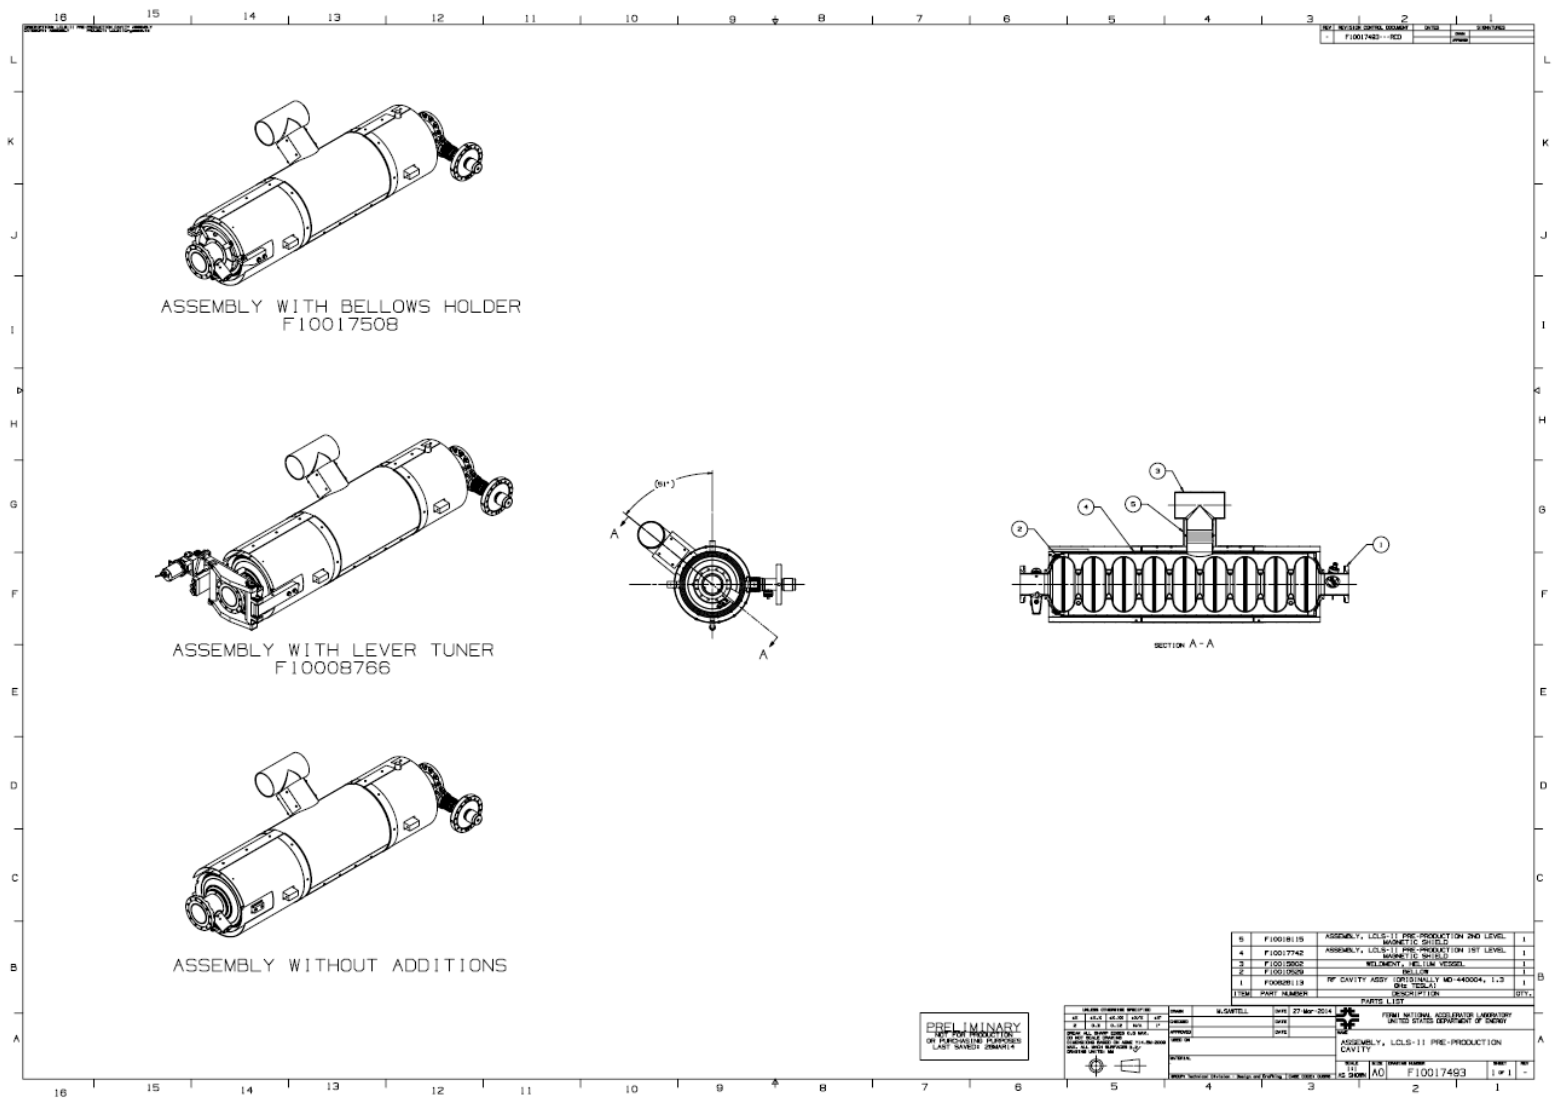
LCLS II Cavity Assembly (Drawing F10017493)
